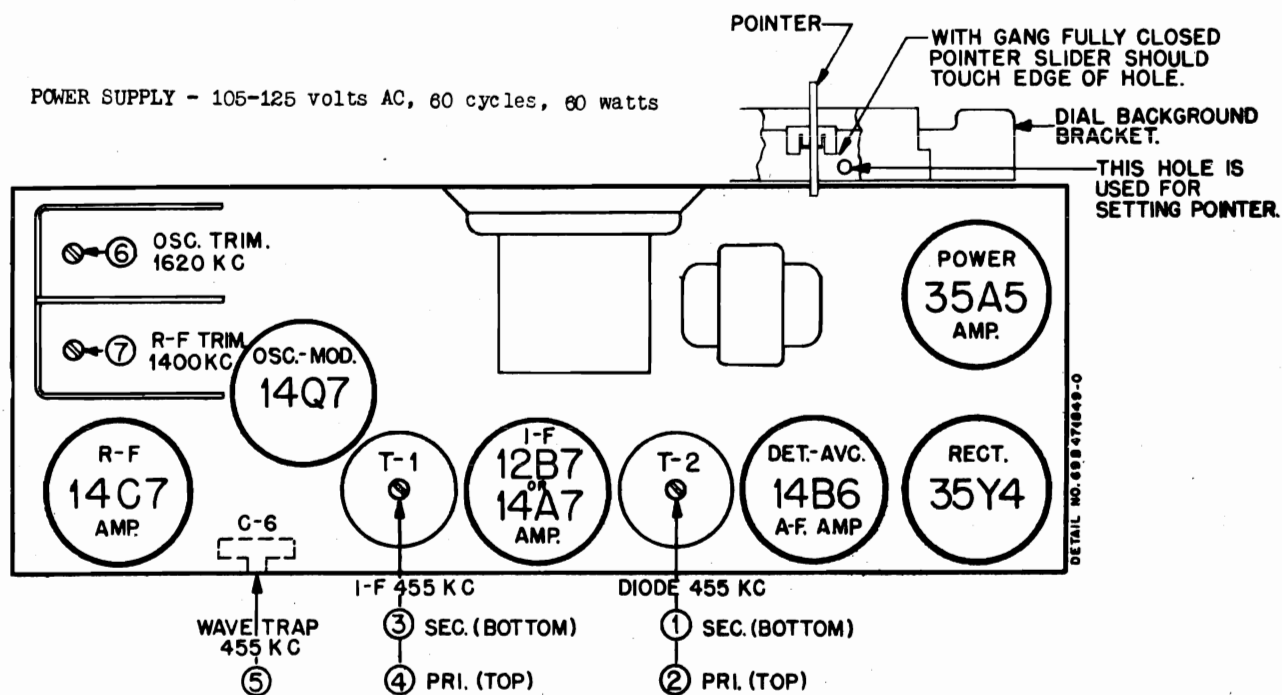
CHASSIS HS-122 TUBE & TRIMMER LOCATIONS
